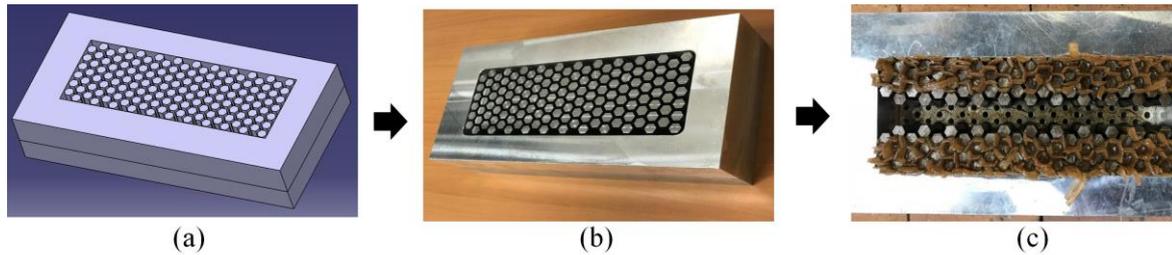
Honeycomb mould: (a) CAD, (b) Mould, (c) Sandwich core fabrication
